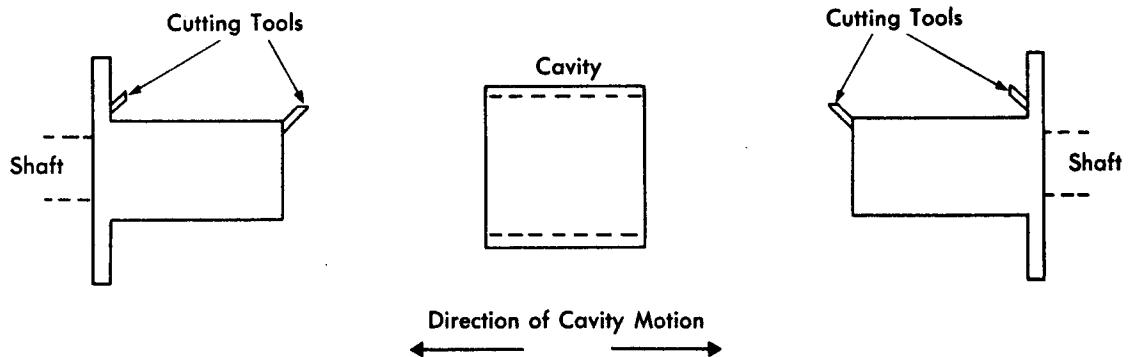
STOKER UNIT USED IN MACHINING AN ECHO BOX CYLINDER
